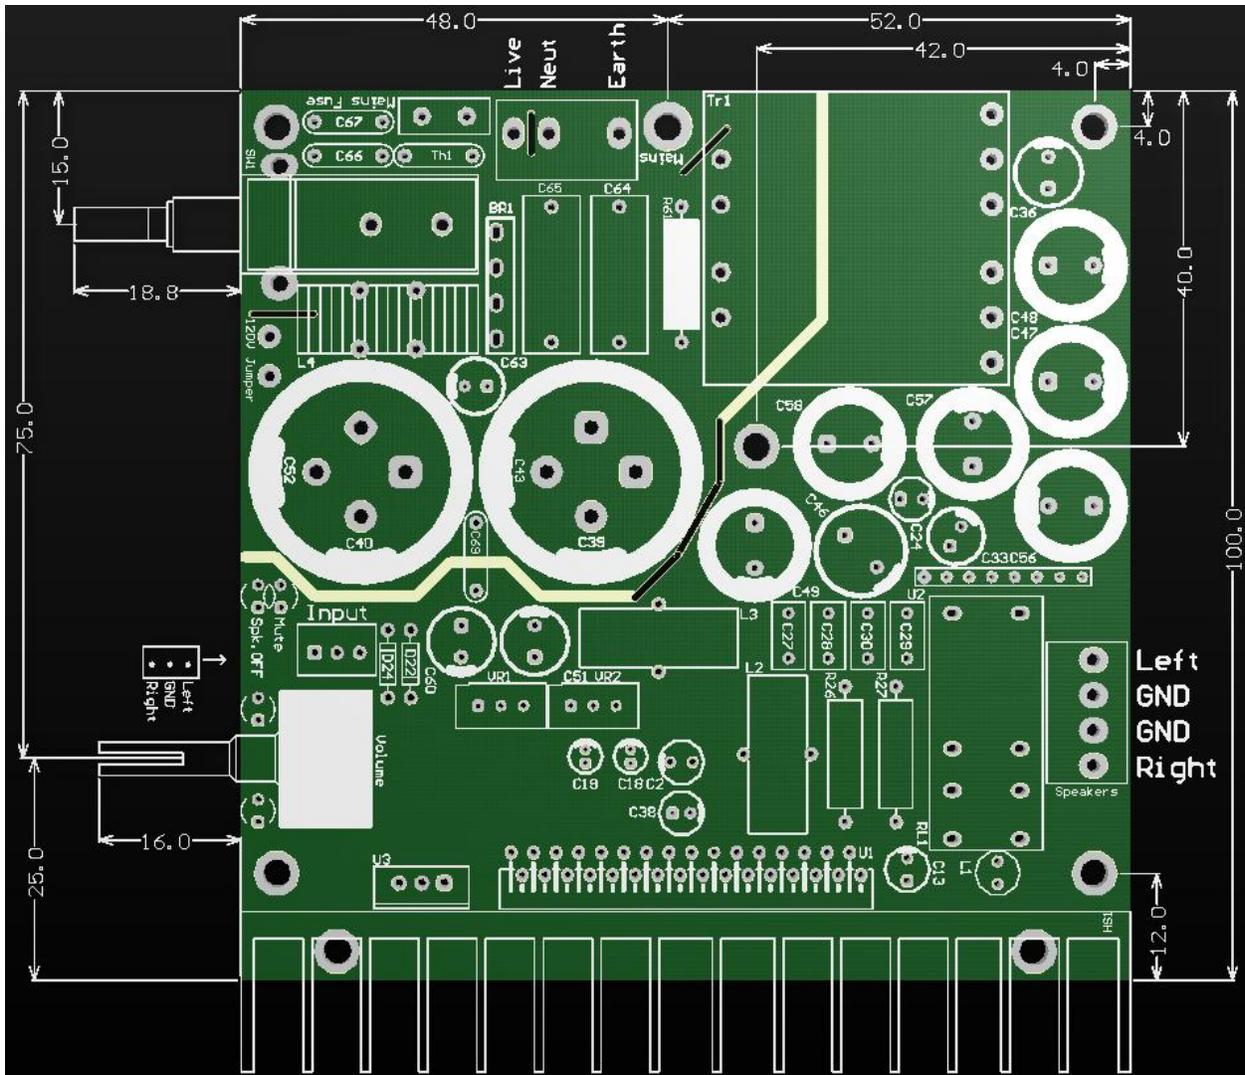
TA2022SMPS Audio Amplifier Module PCB Layout, mounting holes, potentiometer and switch position.
